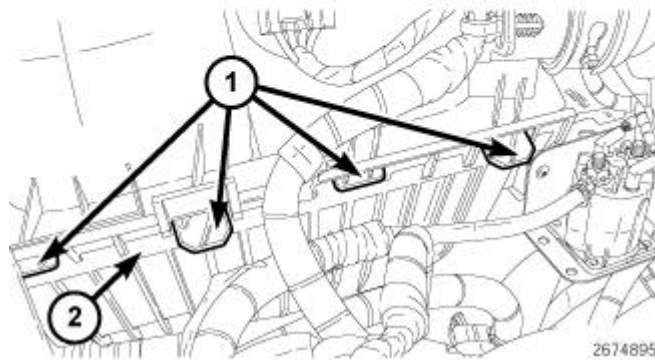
Identifying Air Cleaner Cover Alignment Tabs & Housing Slots
